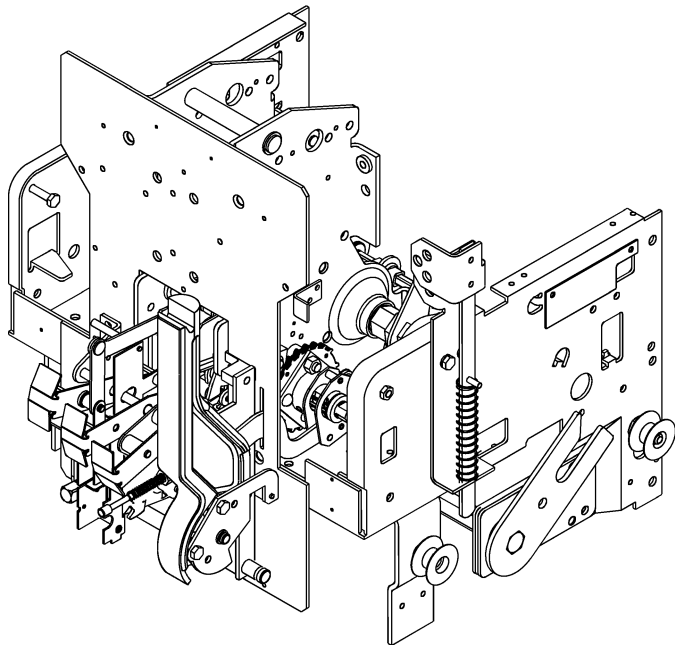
Front Frame Assembly for WPS08, WPF08, and WPH08..
